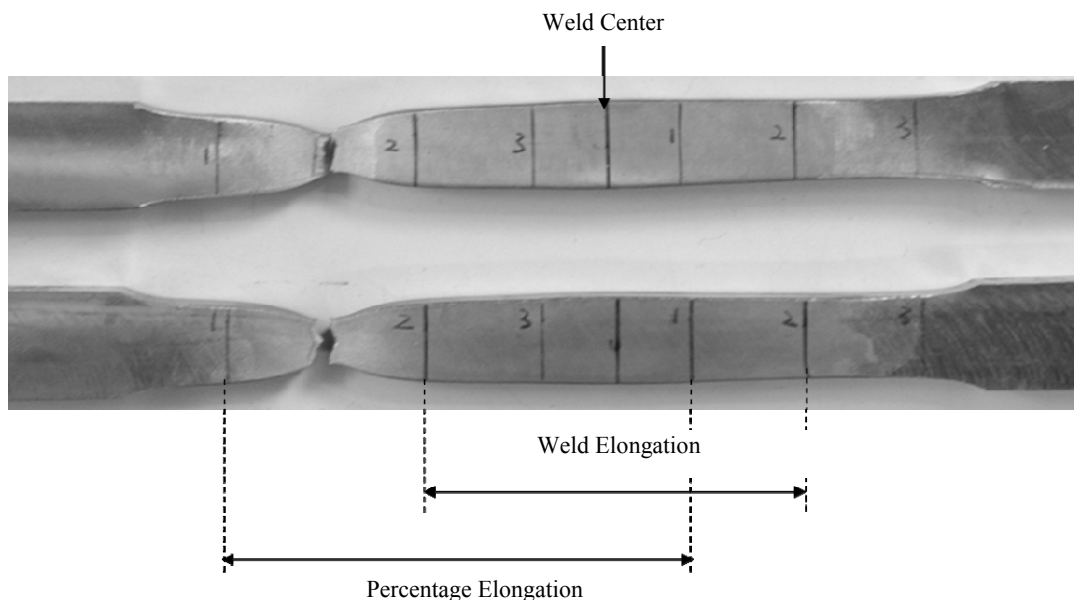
Fractured tensile specimens showing the weld center, weld elongation and percentage elongation within 50.8 mm gauge length.
